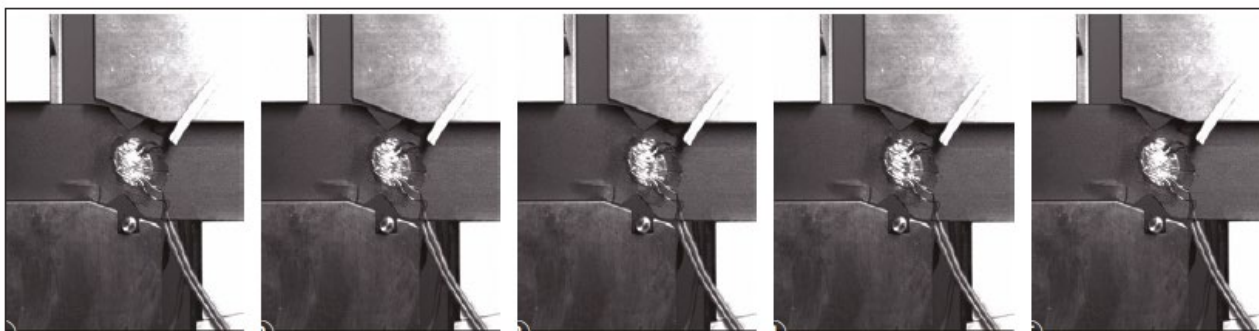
Specimen e Failure Process (images show the point at which the specimen fails)
